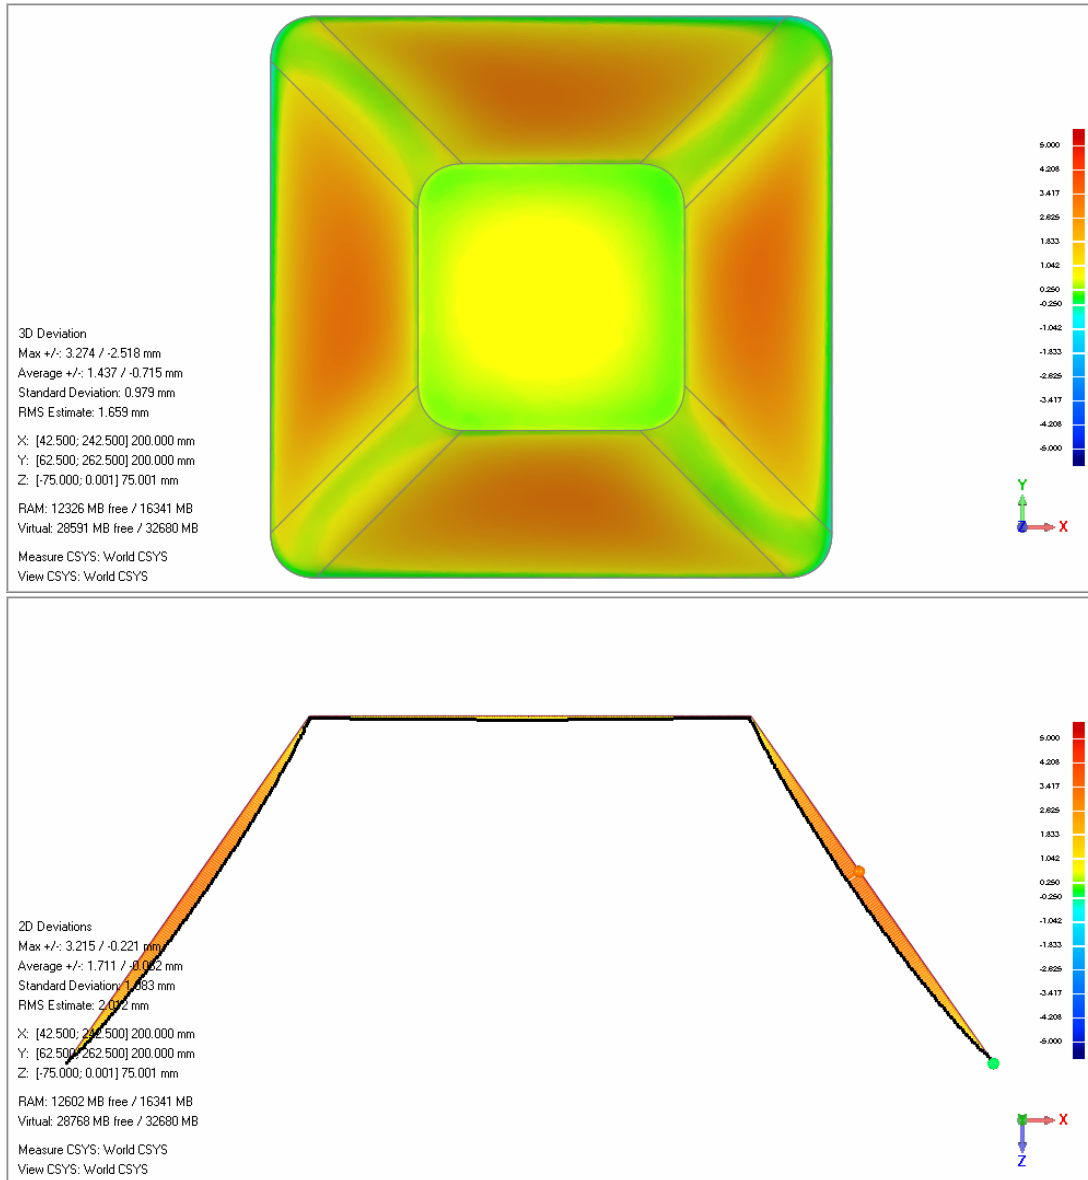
Part T7A geometric accuracy results - top view and cross-section view
